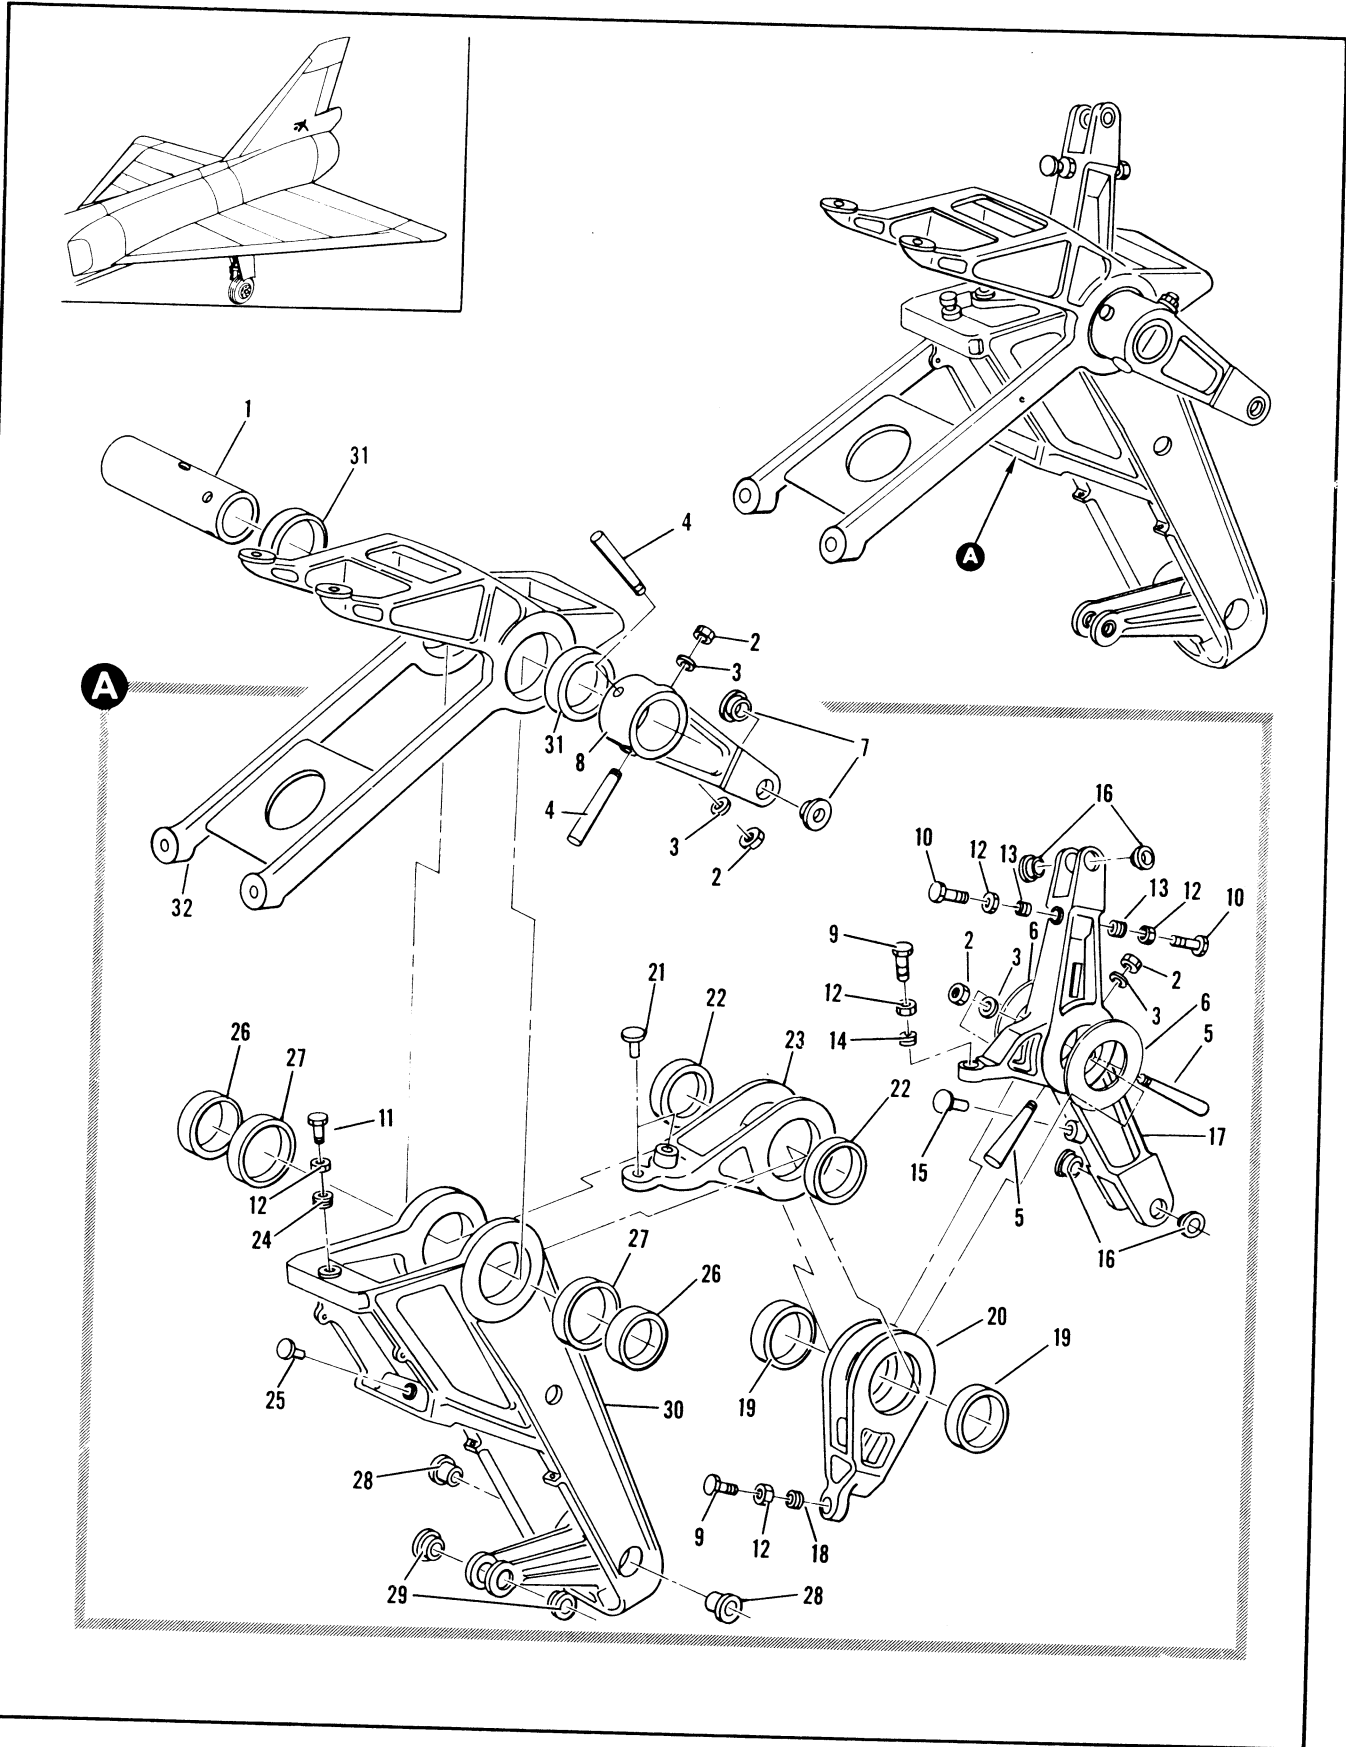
Rudder Trim and Feel Control Assembly
